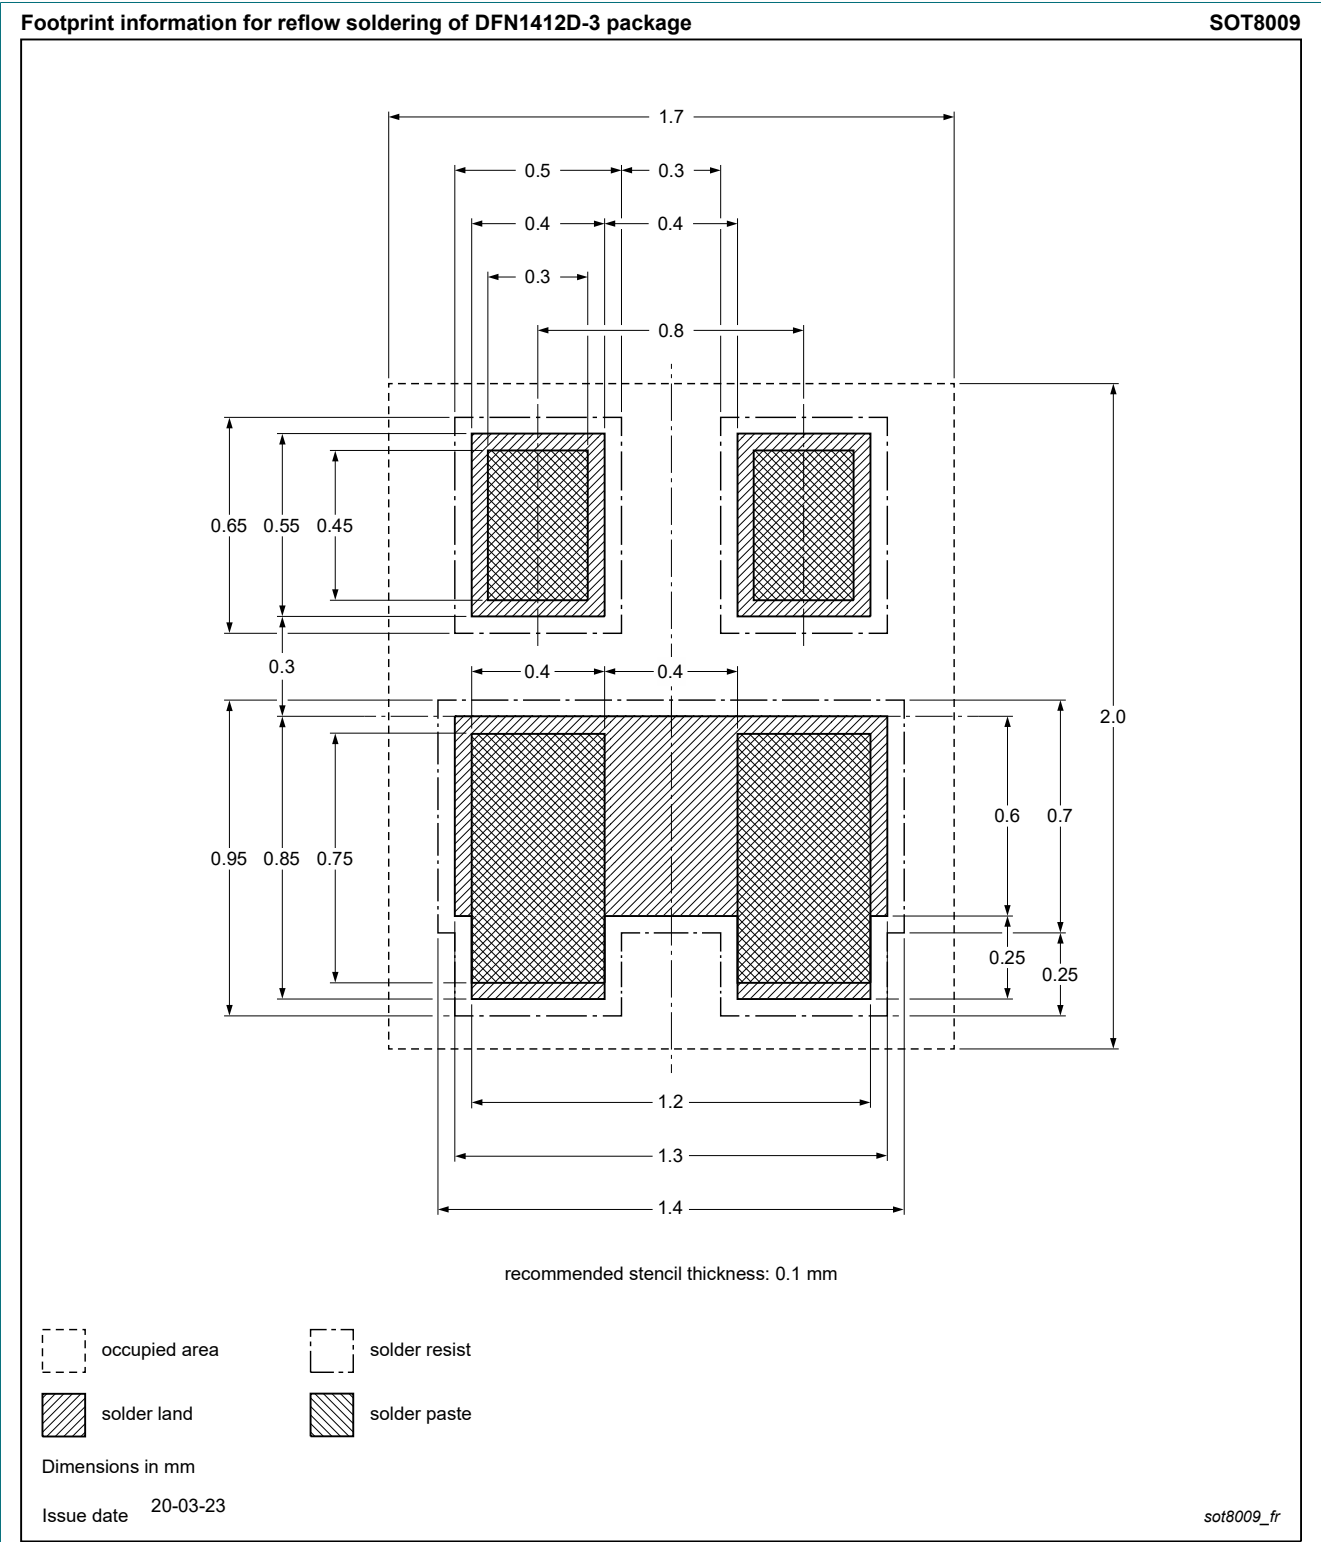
Reflow soldering footprint for DFN1412D-3 (SOT8009)
